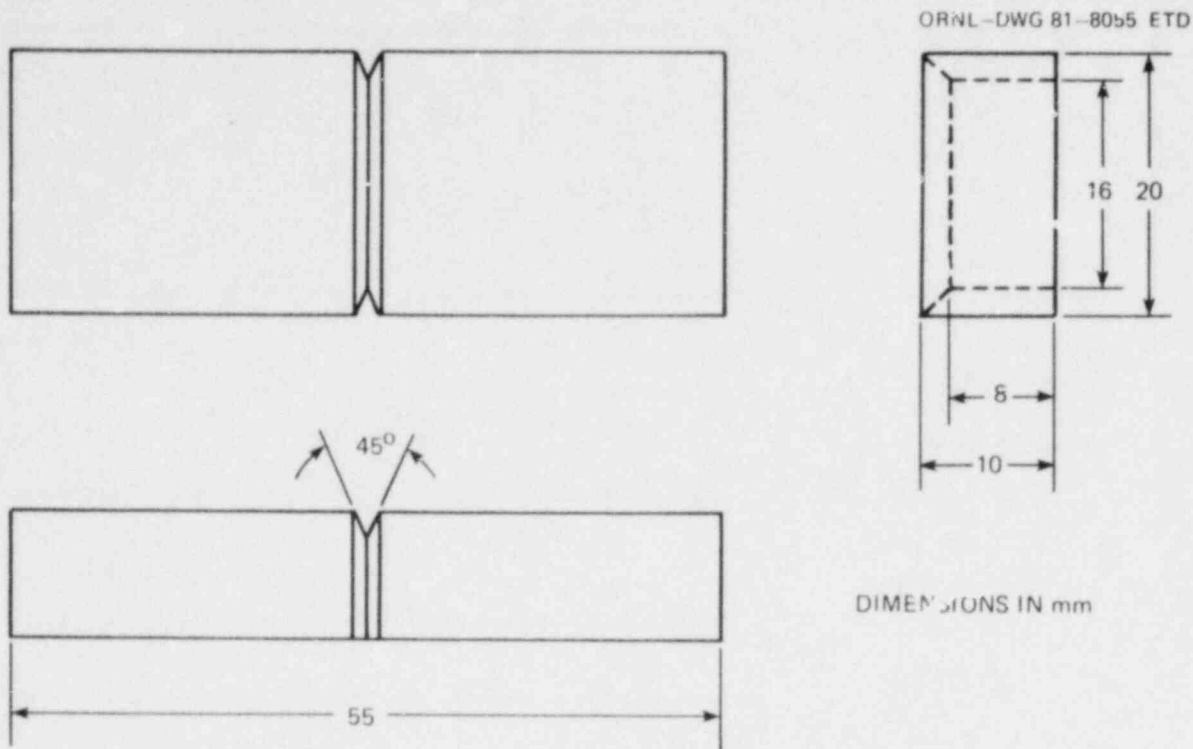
Geometry and dimensions of SGDW specimen.
